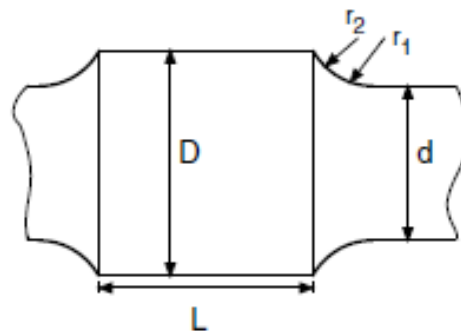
Test rigs and testpiece geometry detailed shape of the press-fitted part [9].
